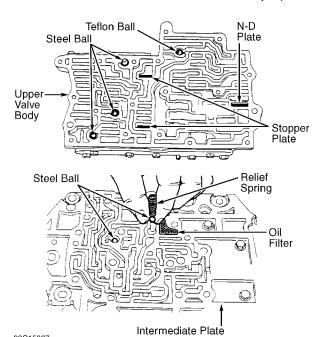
Identifying Balls, N-D Plate, Oil Filter & Relief Spring Courtesy of Mitsubishi Motor Sales of America.
